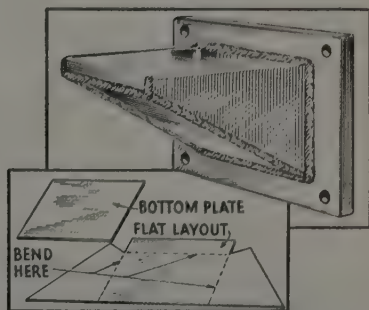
Improved product appearance . . . box-type construction with members sheared, bent to form and welded.
